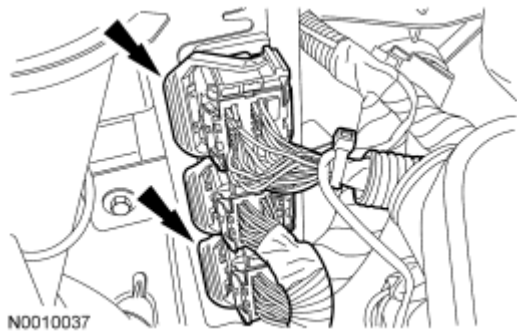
Identifying Upper & Lower Powertrain Control Module (PCM) Electrical Connectors
